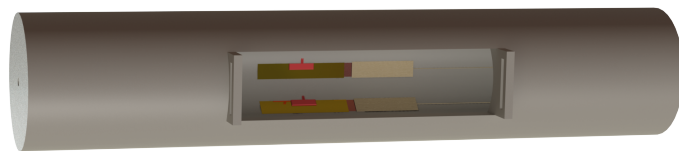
Heat flux gauge design from back. Foil heater and thermocouples have been attached to copper plates.
